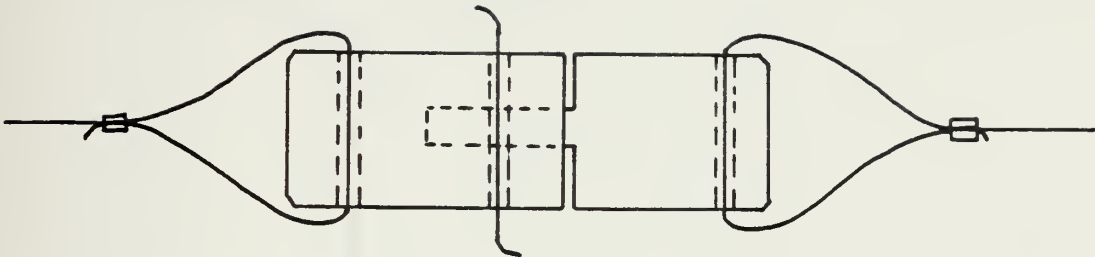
The breaking mechanism, consisting of two fitting steel parts and a copper pin
